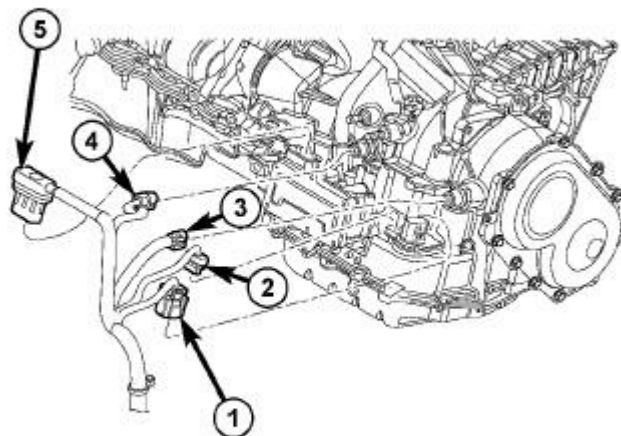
Crankcase Vent Hose Heater Electrical Connector & Turbocharger Inlet Tube
